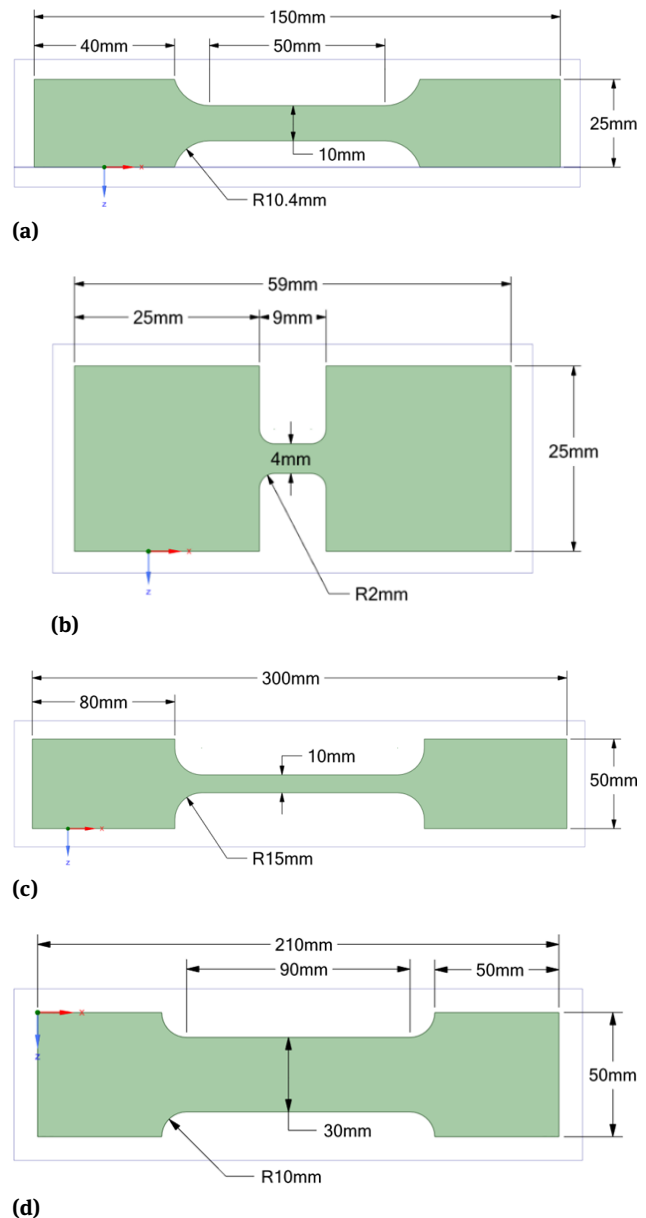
Tensile test specimens with rectangular cross-section: (a) tensile test specimen 1; (b) tensile test specimen 2; (c) tensile test specimen 3; (d) tensile test specimen 4
